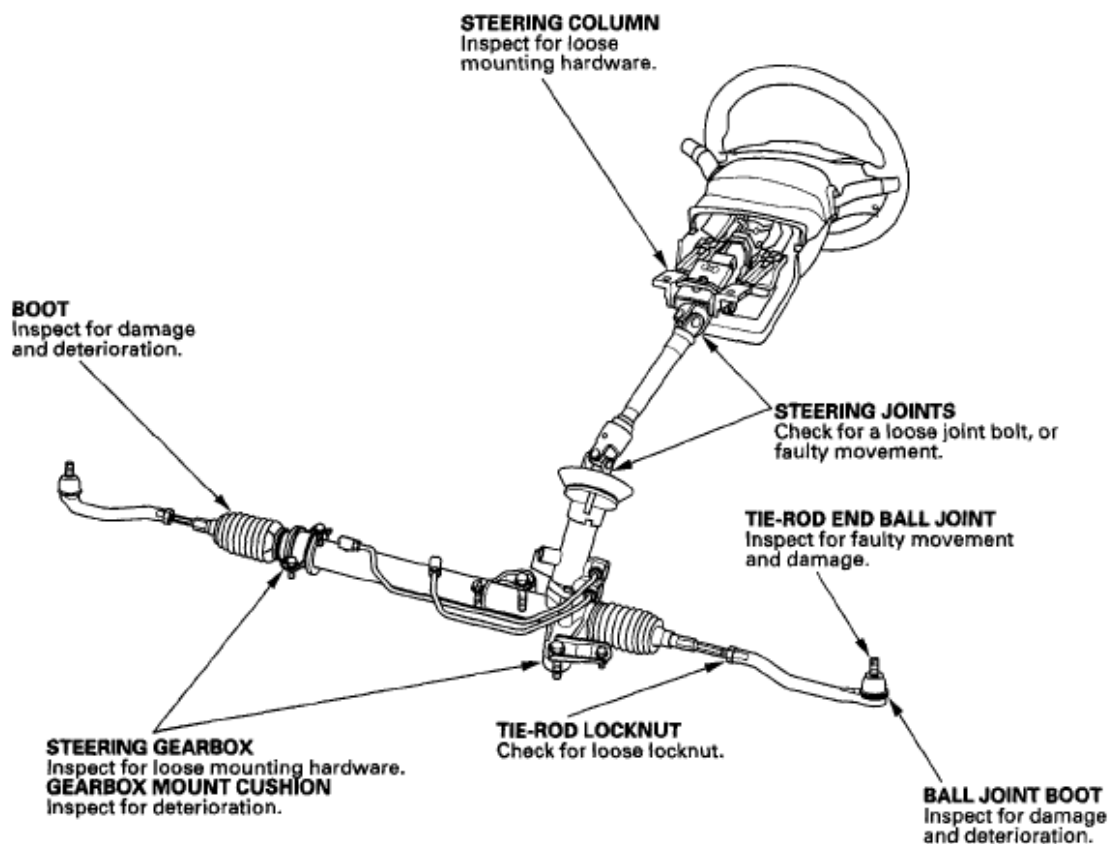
Identifying Steering Linkage And Gearbox Components Location
